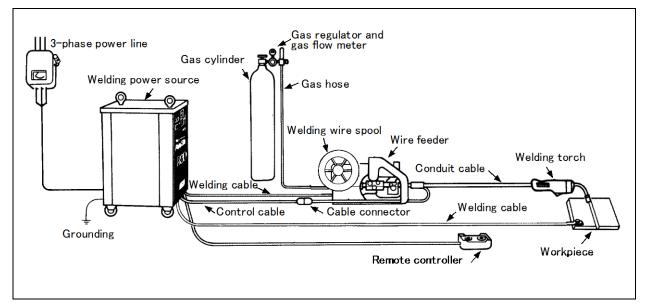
Typical arrangement of the gas shielded metal arc welding process (Source: a brochure of DAIHEN Corp.)
